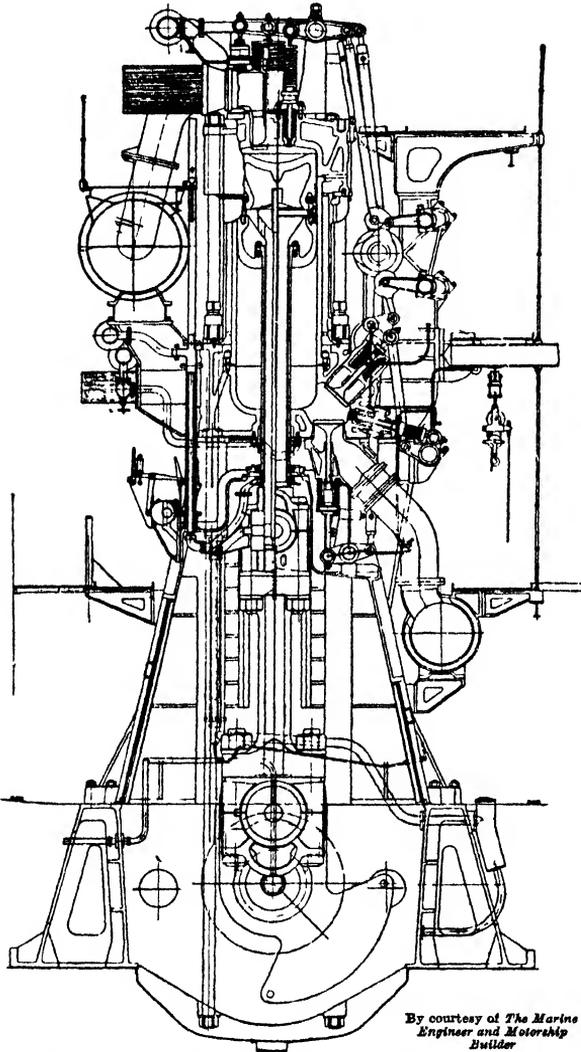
Sectional View of the B. & W. Double-acting Engine as installed in T.M.S. *Kungsholm
